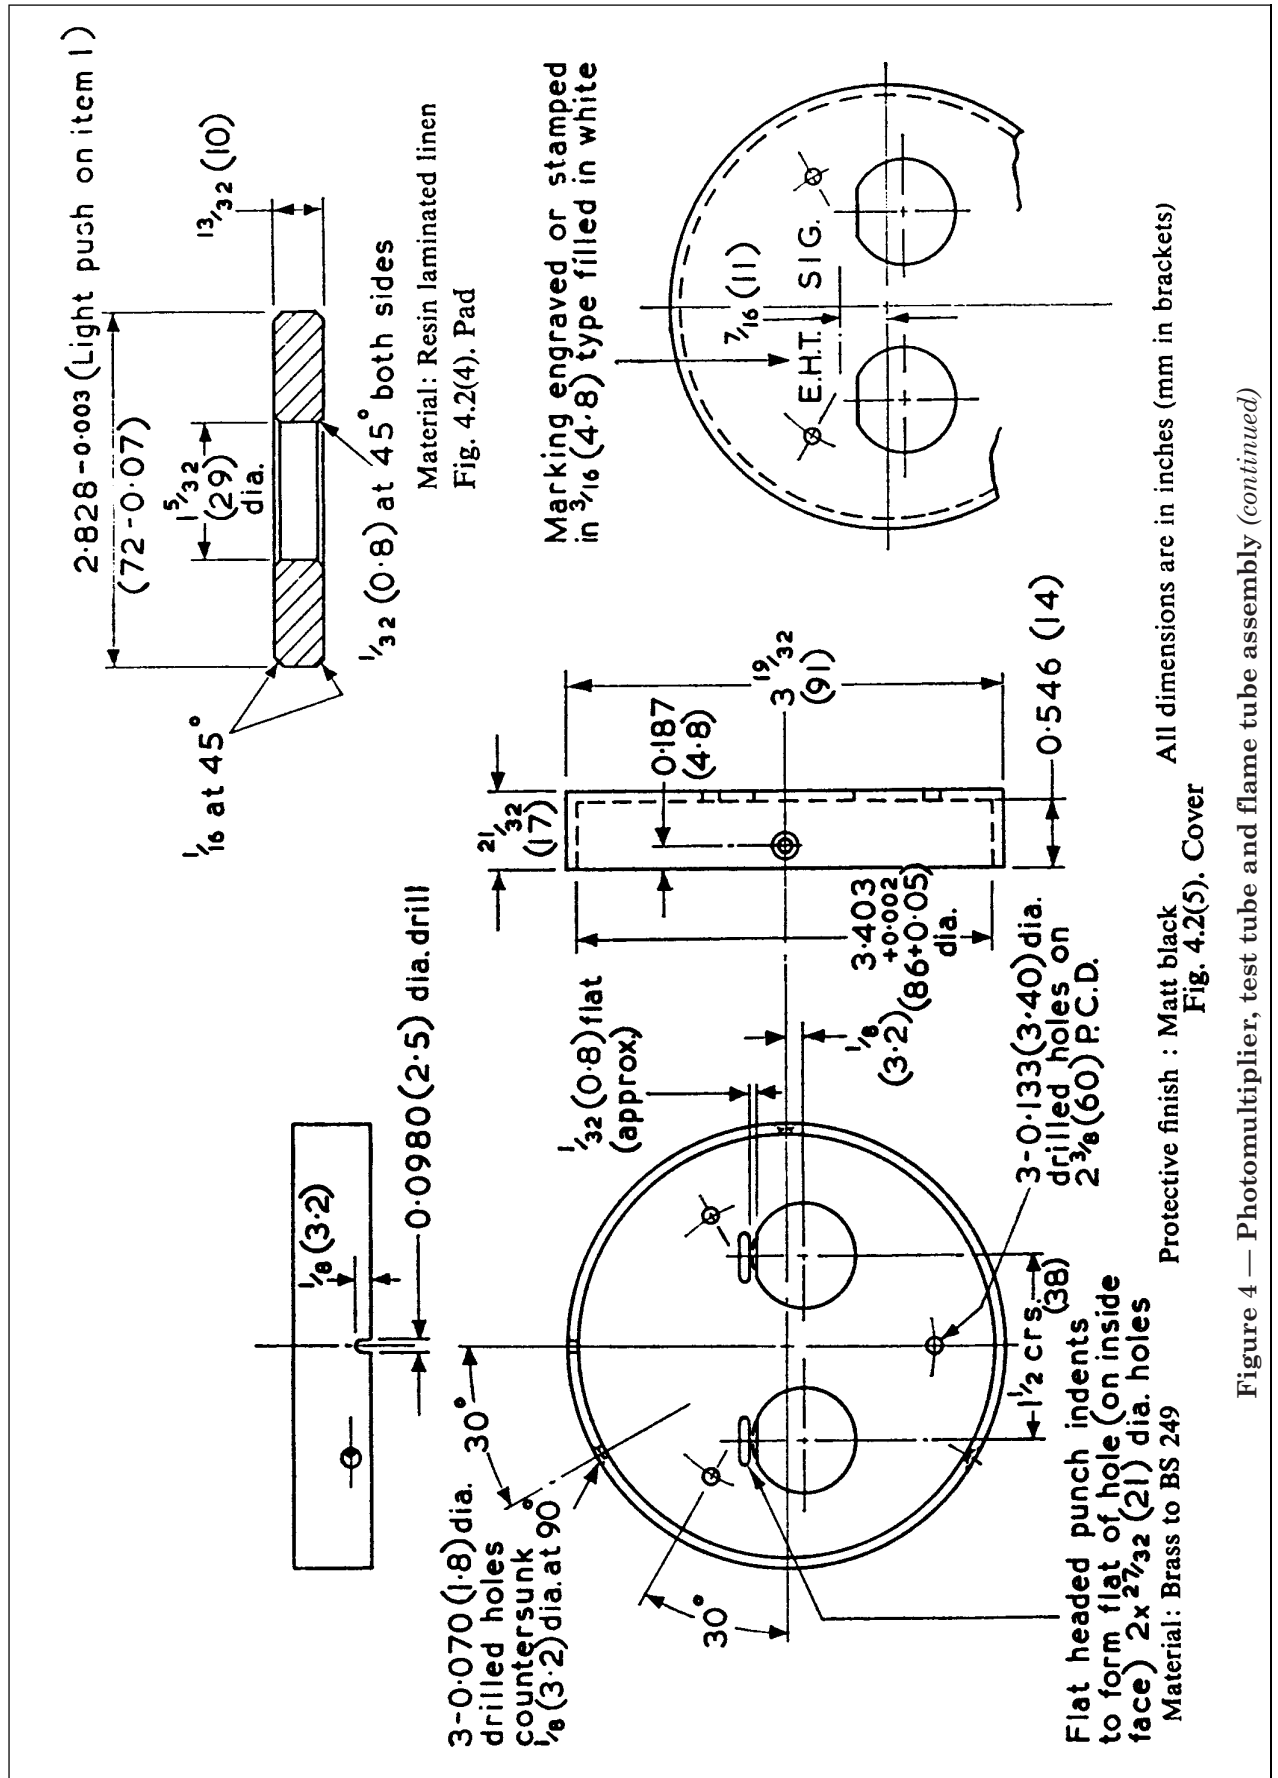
Photomultiplier, test tube and flame tube assembly (continued)
